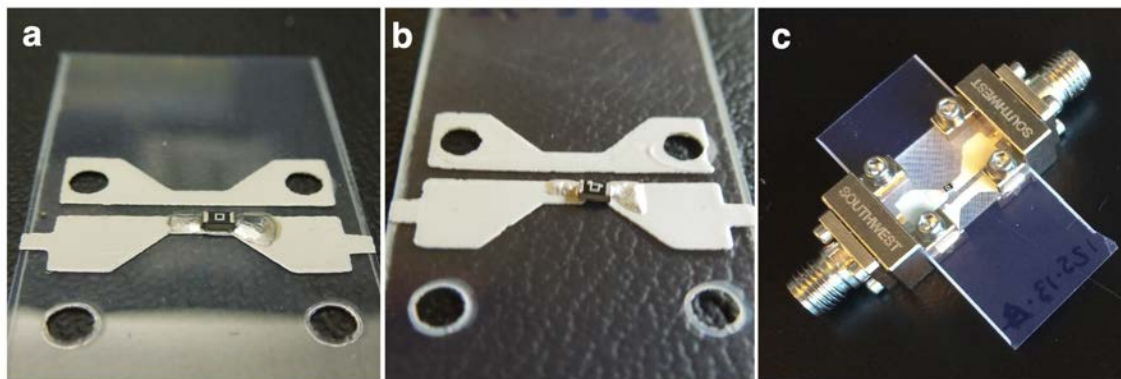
a) Zero-ohm resistor mounted with low temperature solder. b) Zero-ohm resistor mounted with screen printable silver ink. c) Test traces connected to adapters for RF cables.
